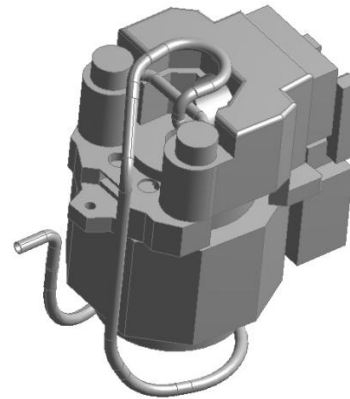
REDUCED GEOMETRY OF THE COMPLETE COMPRESSOR WITHOUT COVER
